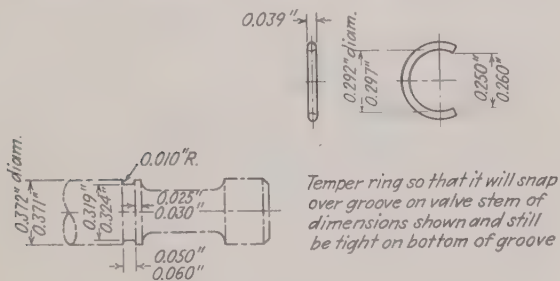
This drawing, showing mating surfaces, gives the spring manufacturers clear and complete information on the requirements of the part and the job it must do.
